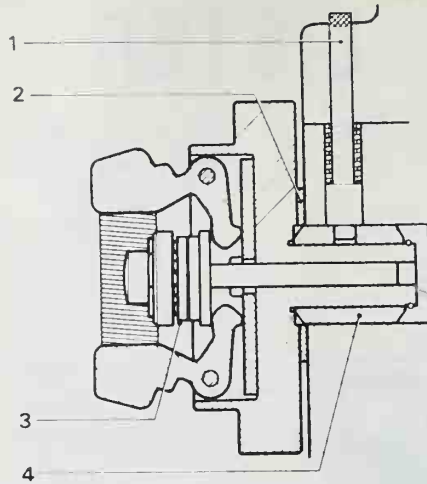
Governor gear is driven directly by the camshaft and runs in a renewable bearing.
